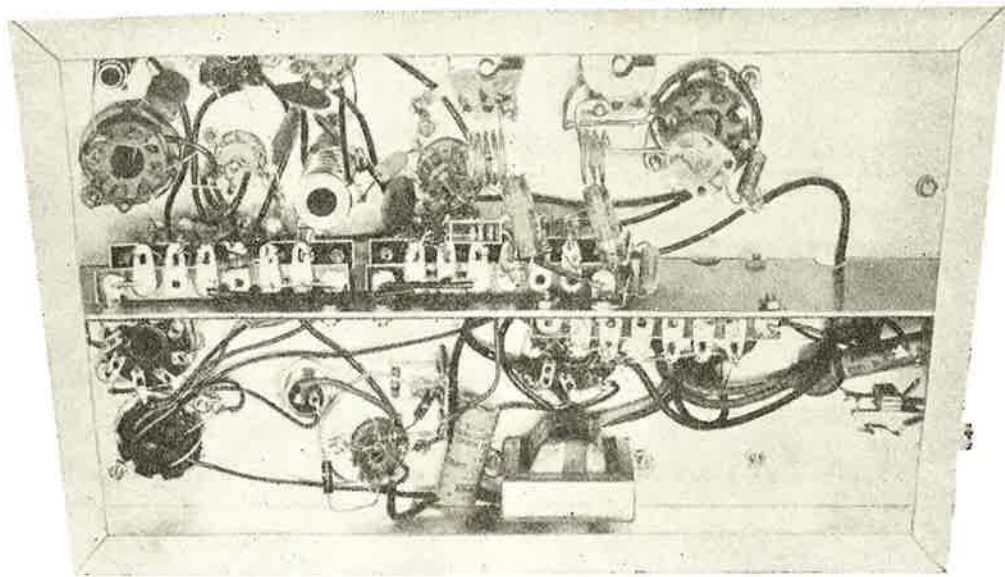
Bottom view of the transmitter. The resistor board provides the necessary mechanical support for mobile operation.
